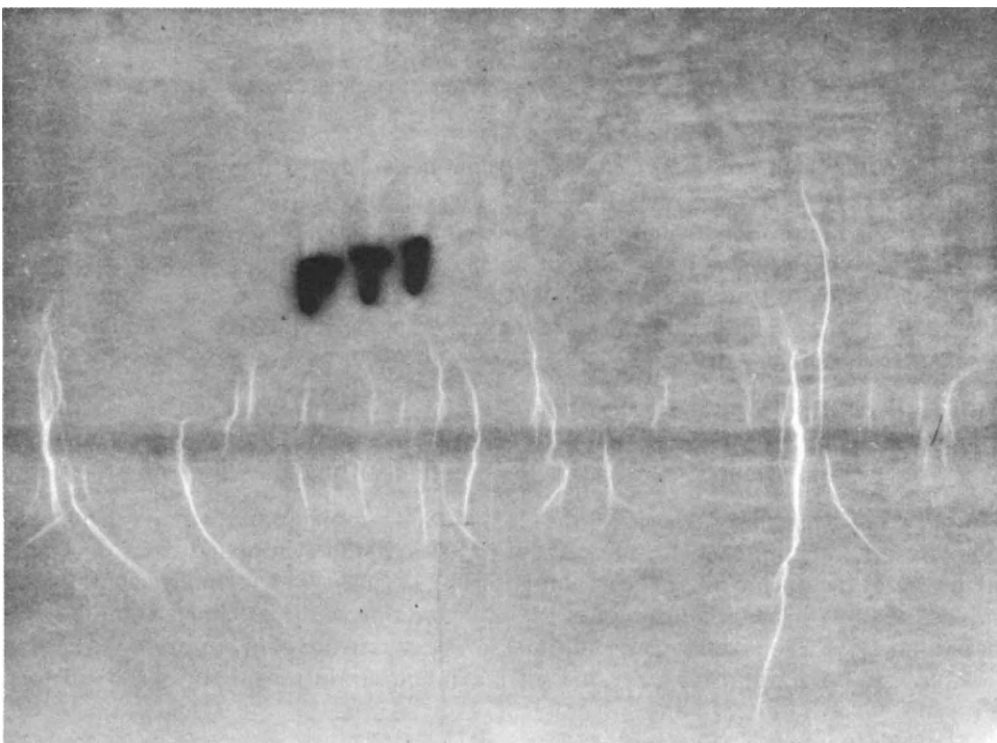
Radiograph of butt-welded specimen made with a commercial low-alloy high-strength steel plate after stress-corrosion cracking test for 31 hours (Masubuchi and Martin).
